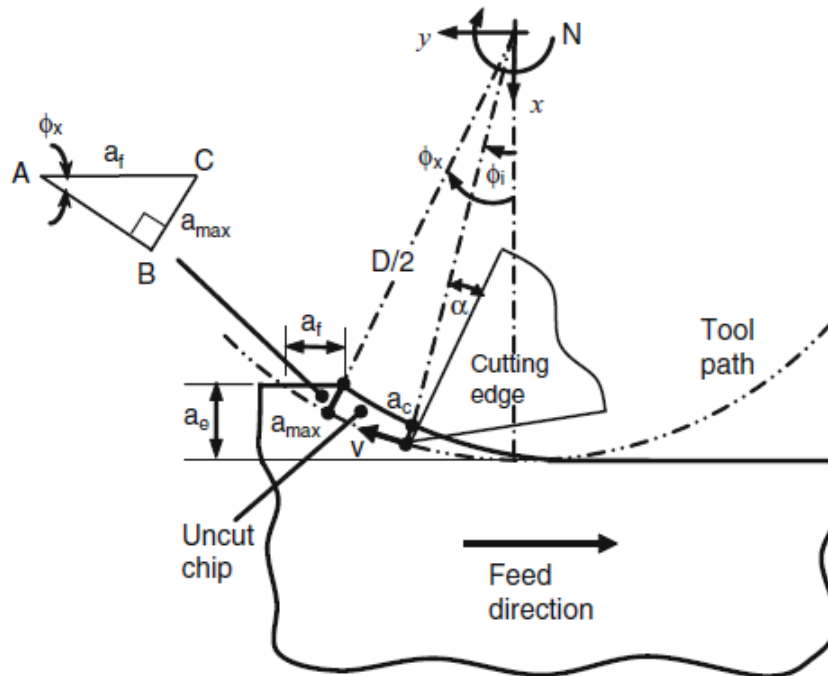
Cutting geometry in end milling, peripheral milling and edge trimming
